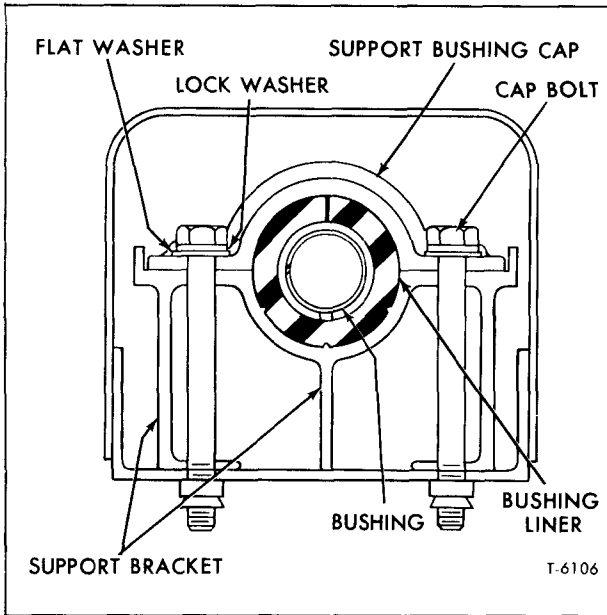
Steering Shaft Lower Support Bushing Assembly (Alum. Tilt)
